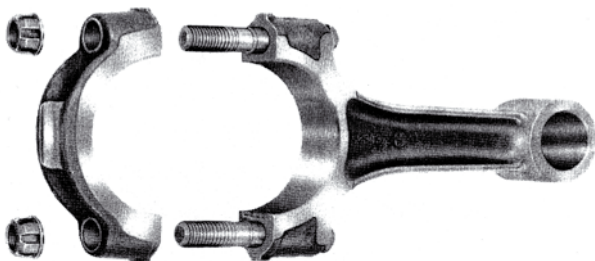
The new connecting rod assembly has been fatigue-tested at 7000rpm.
